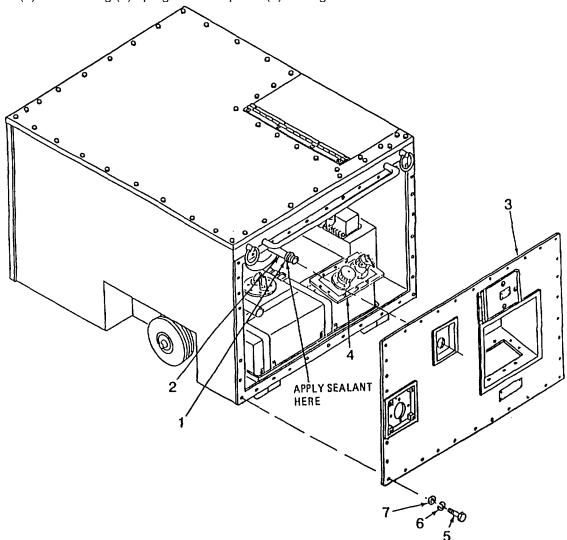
Rear Panel Installation (Sheet 1 of 2)
